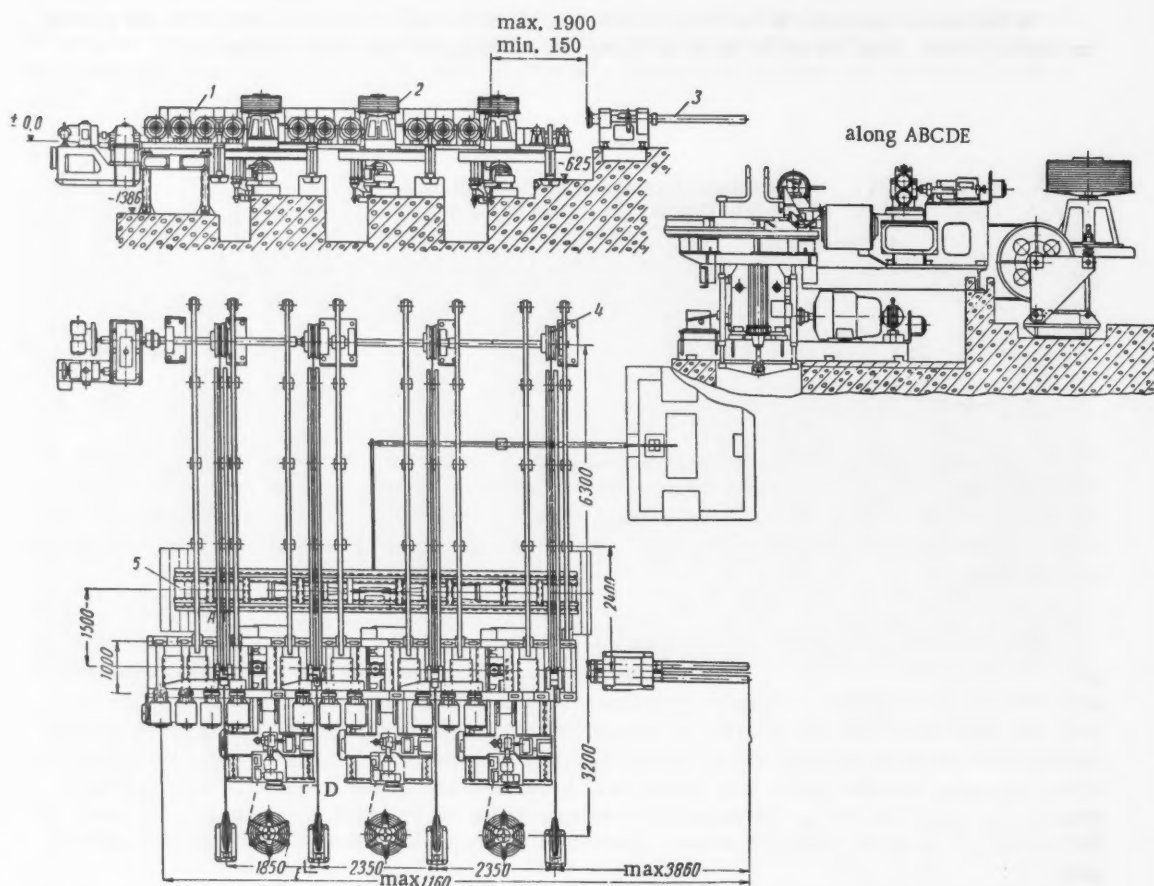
General view of binding line with transfer equipment: 1) Binding roll-table; 2) binding machine; 3) adjustable stop; 4) transfer; 5) weighing machine.
